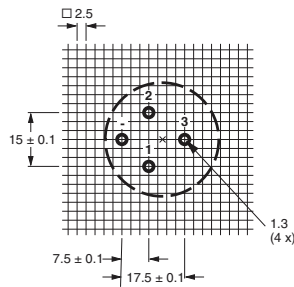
Mounting hole diagram viewed from component side (Case Ø D = 35 mm)
